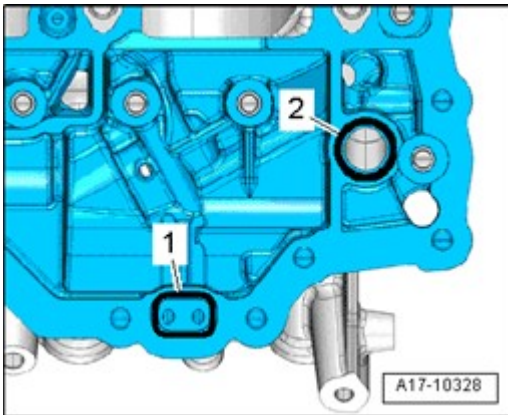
Inserting Seal And O-Ring In Guide Frame
